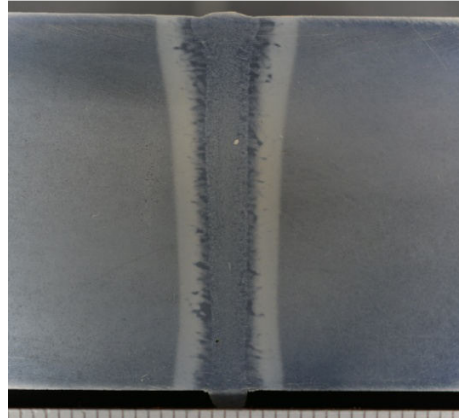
Macrograph of the RPEB 30 mm weld.
